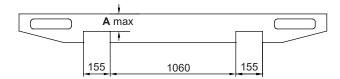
ZL-45-90, ZL-75-90, ZL-45-110, ZL-75-110 ZLU-45-90, ZLU-75-90, ZLU-45-110, ZLU-75-110
